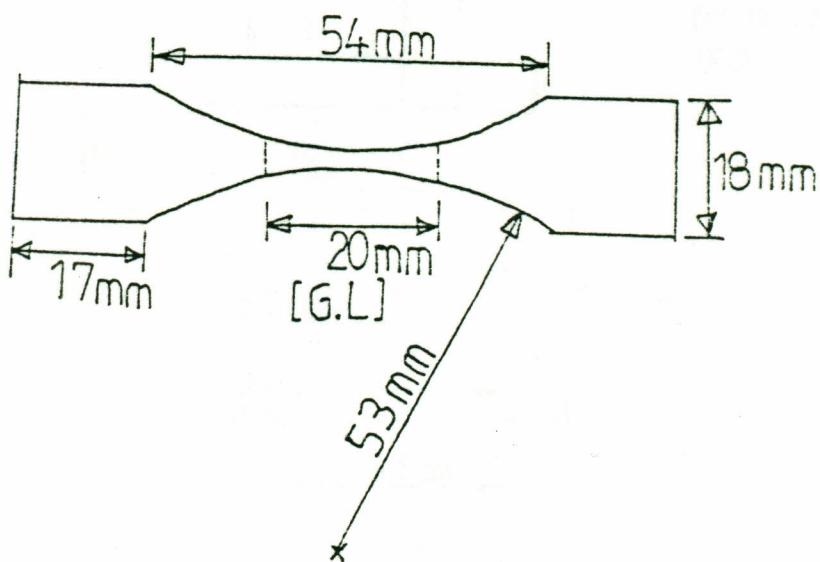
Specimen profile for stretching, narrowest section width = 3 mm.
